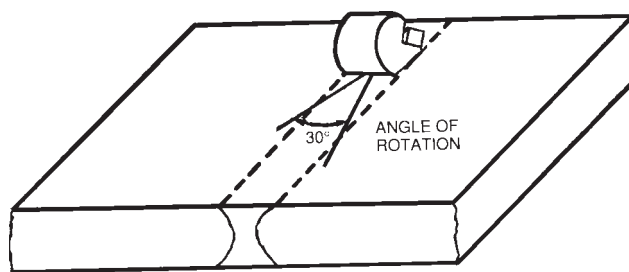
Supplementary Technique 2, for Inspecting Butt Welds for Suspected Cross-Cracking when the Weld Bead is Ground Flush
